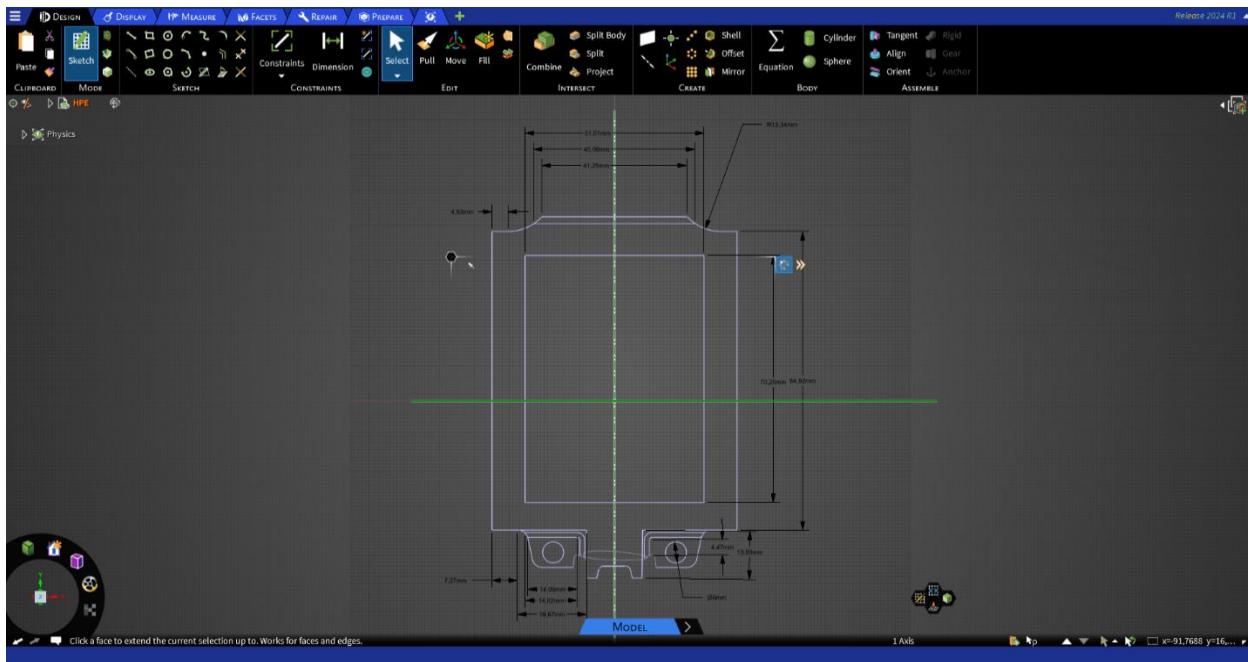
Heatsink attachment mechanism cross-sectional view and mounting details
